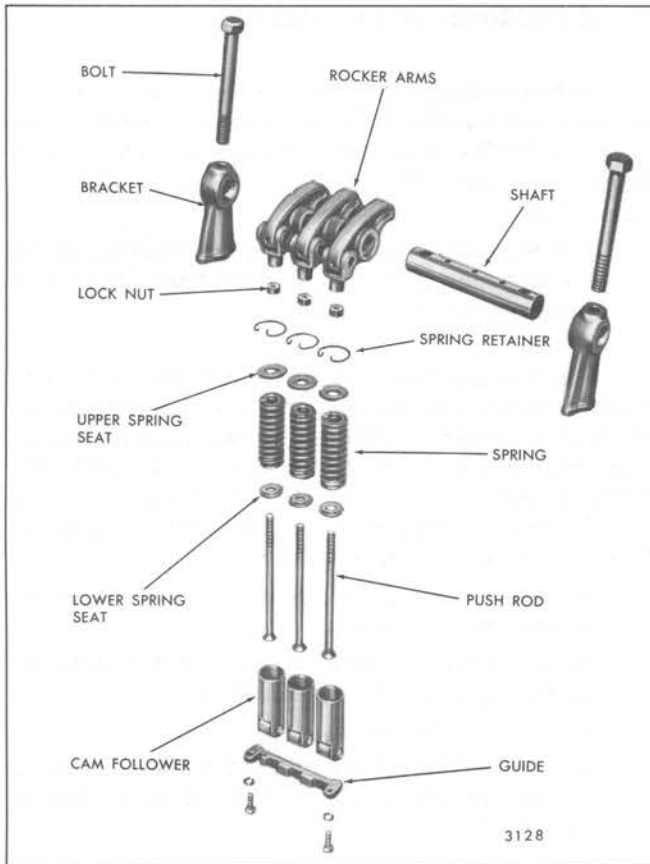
Valve and Injector Operating Mechanism and Relative Location of Parts
